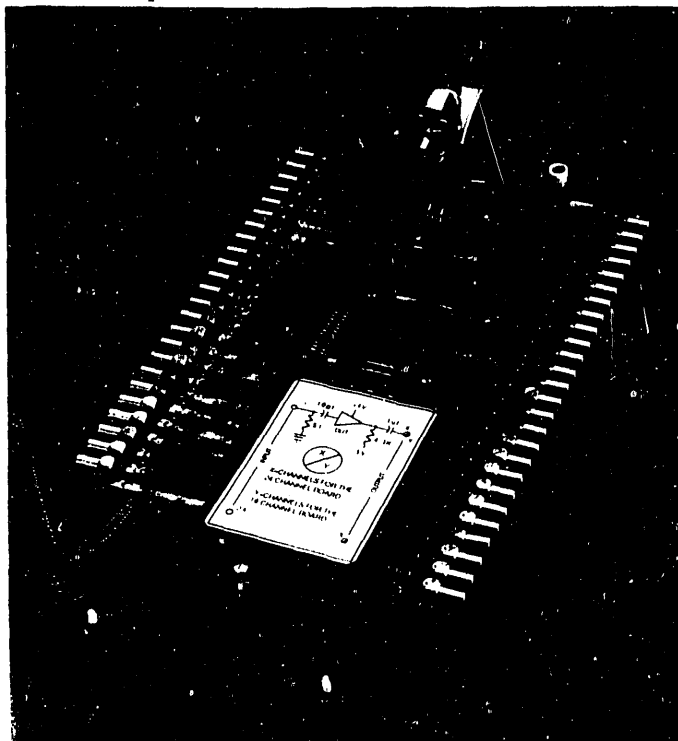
VTX preamplifier circuit board tester with latch open to show circuit card.
